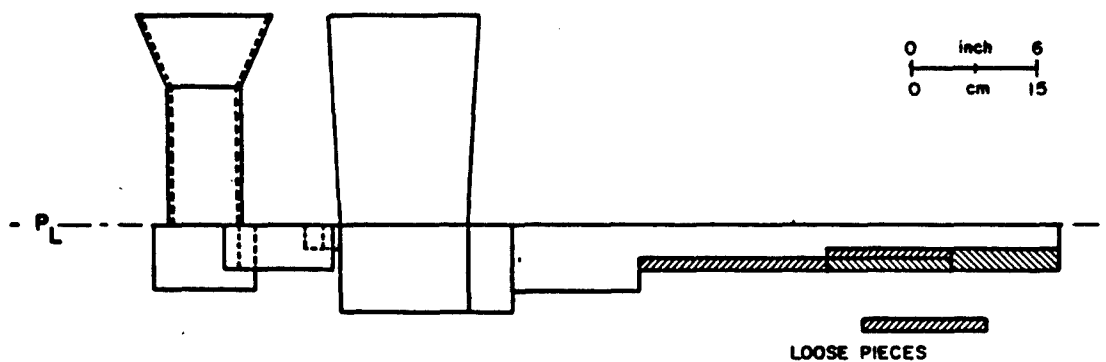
Side view of Blaw-Knox pattern for test plates.
